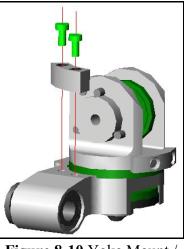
Yoke Mount / Pivot Stop exploded assembly
